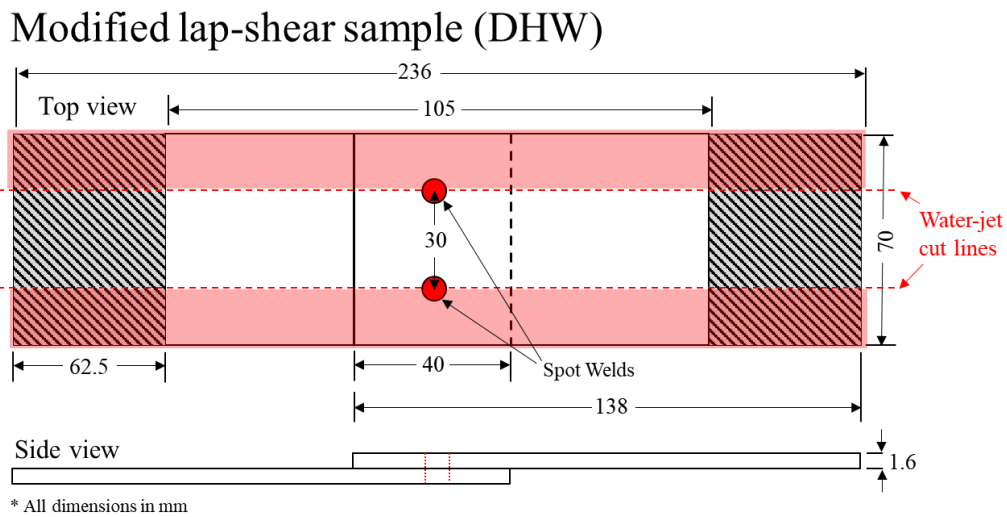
Schematic of the modified double half-weld lap-shear test geometry.
